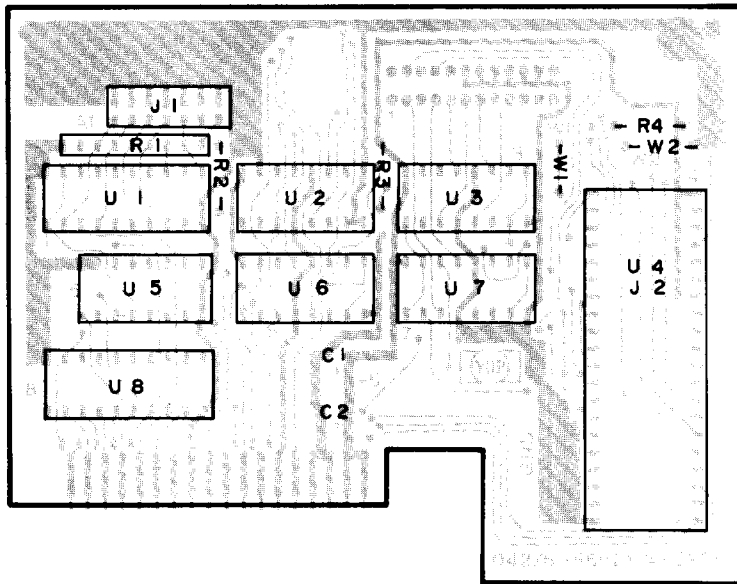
A21 HP-IB Board Assembly Component Locations.
